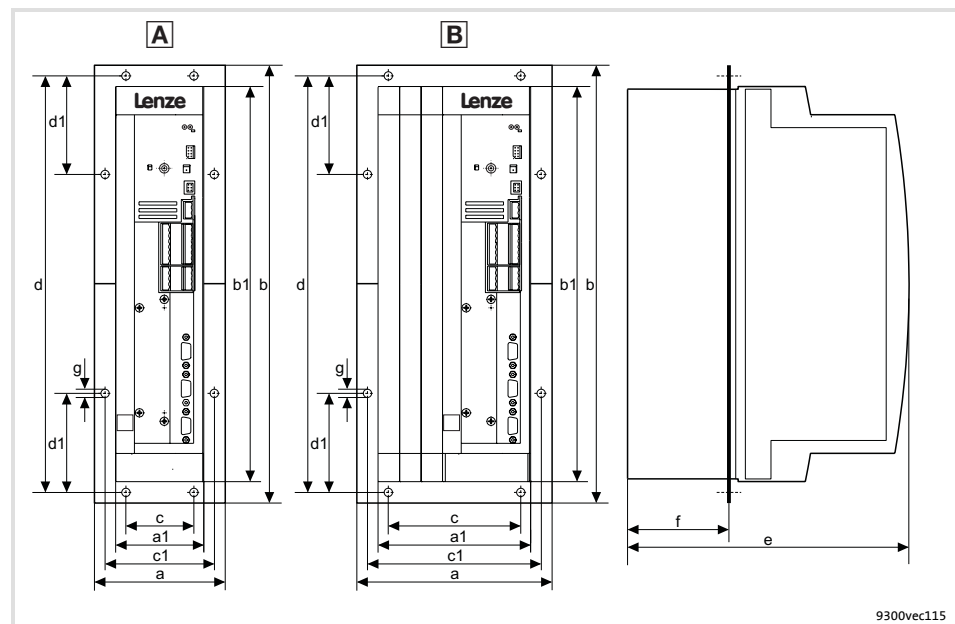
Dimensions for thermally separated mounting 0.37 ... 11 kW
